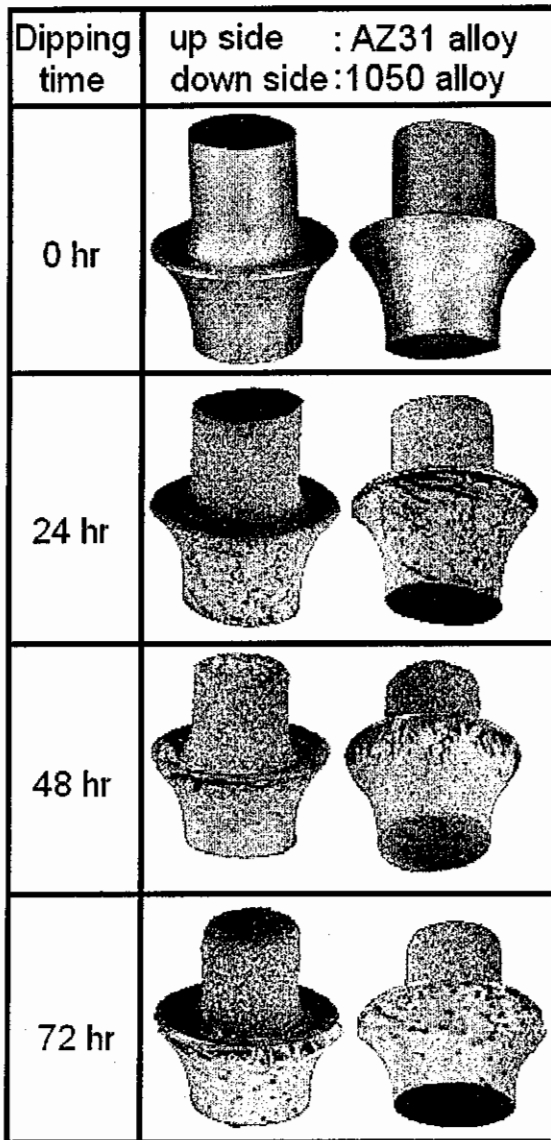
Appearances of corrosion tested joint with burr.
